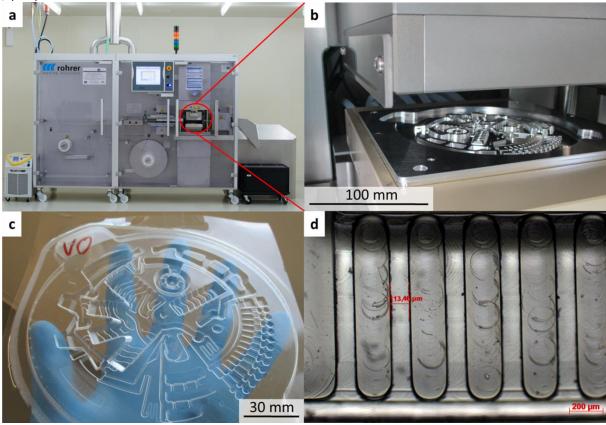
a: Thermoforming machine Rohrer R760S b: Aluminum tool (lower tool with positive mold) in the process chamber c: Image of thermoformed functional packaging with microfluidic structures and d: Microscope image of a thermoformed structure made from PC (Makrofol®)
